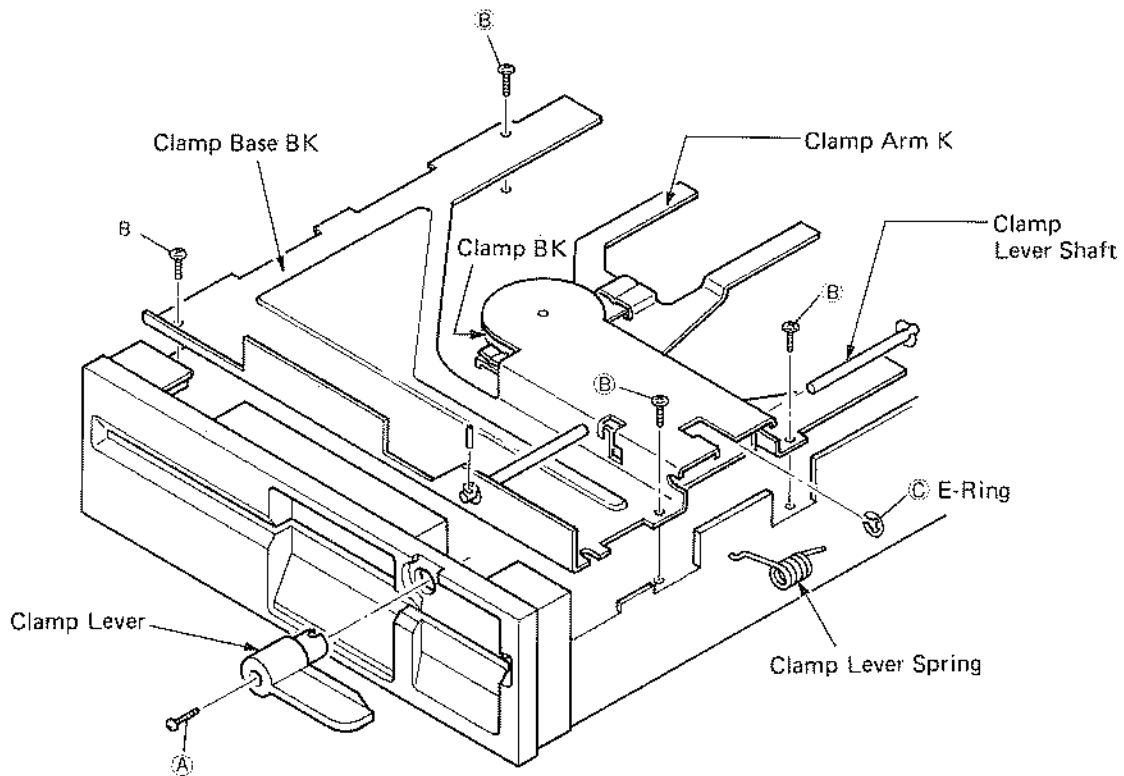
Clamp Base BK and Clamp Arm K Removals
